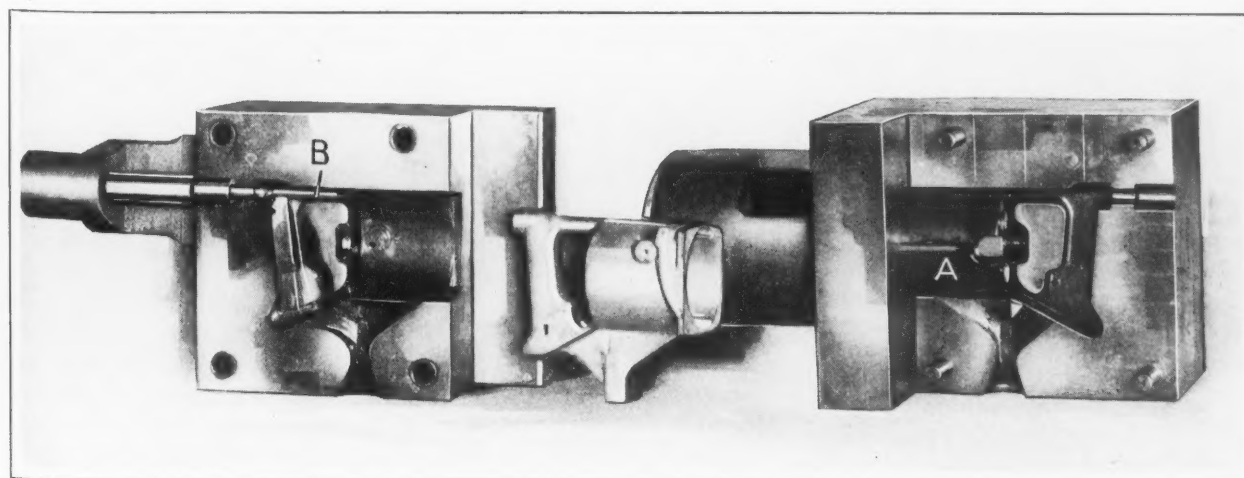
Construction of Die Used in Casting the Rear Portable Electric Saw Housing Shown in Fig. 7, which Requires the Pulling of a Slender Core from the Handle
